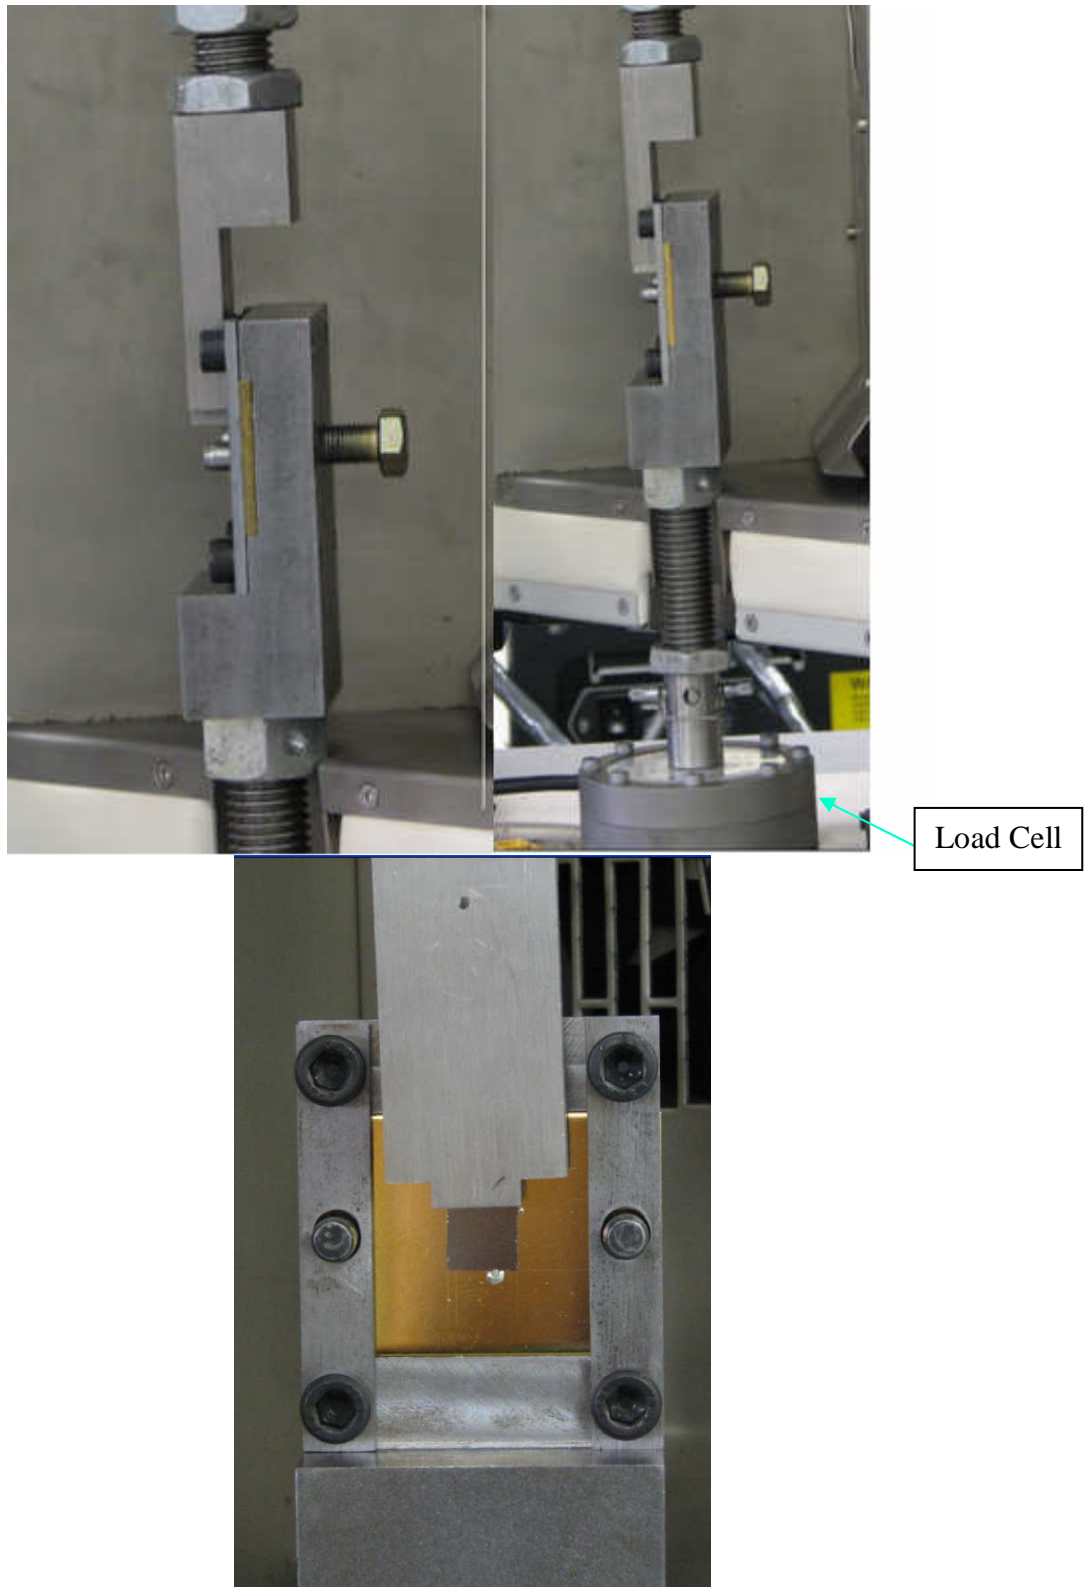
Fixture assembled on the micro tester with latest fixture design
